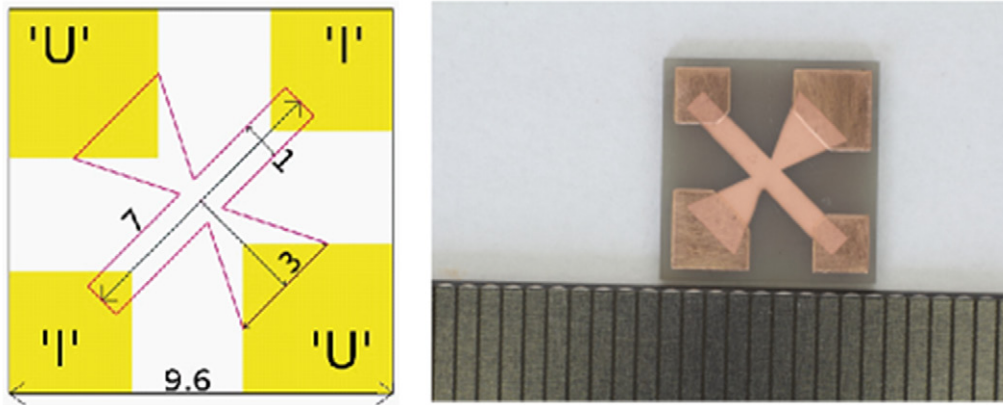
(a) Design of the Hall sensor (9.6 mm dimension). (b) Manufactured Hall sensor.
